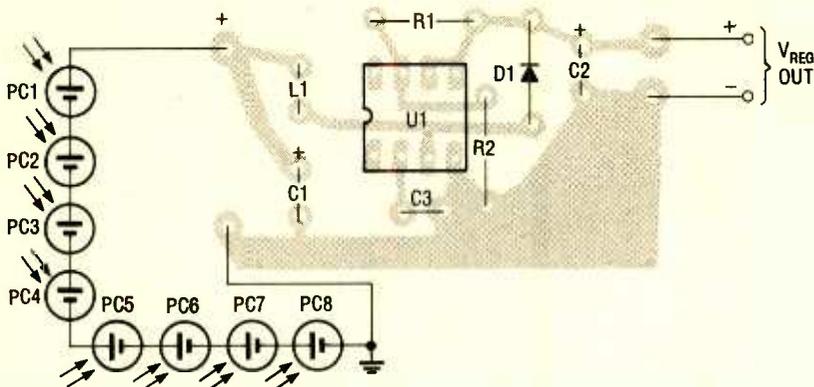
When gathering the components for the switching-regulator board, be sure to use the parts specified in the Parts List, including the use of metal-film resistors where called for, and a Schottky diode.
